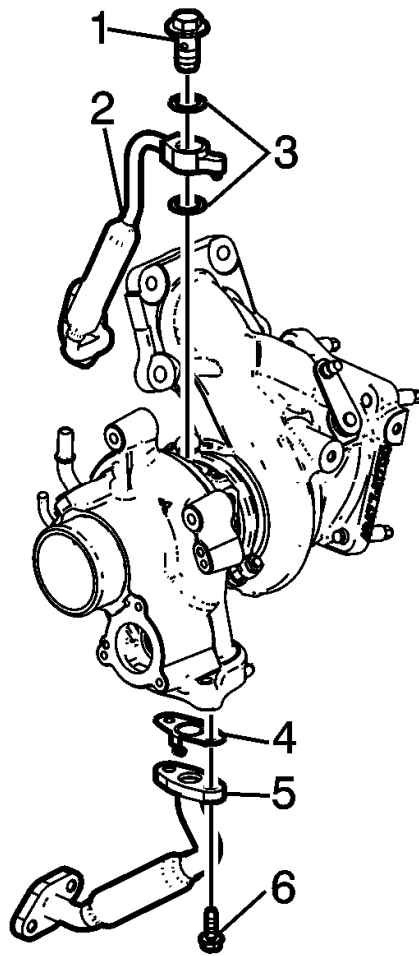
Turbocharger Oil Feed Pipe Bolt
